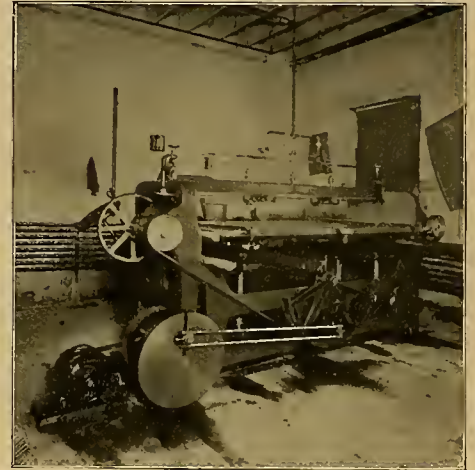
INDUCTION MOTOR BELTED DIRECT TO RUBBING MACHINE
